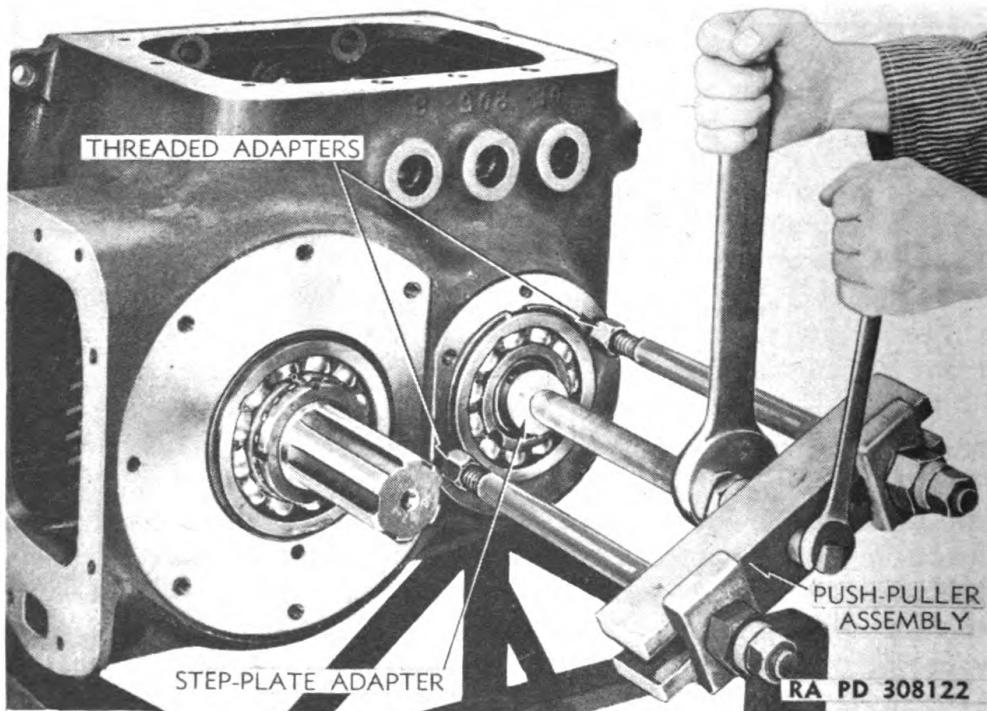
Pressing Pinion Shaft Out of Housing, Using Puller (41-P-2905-60)
